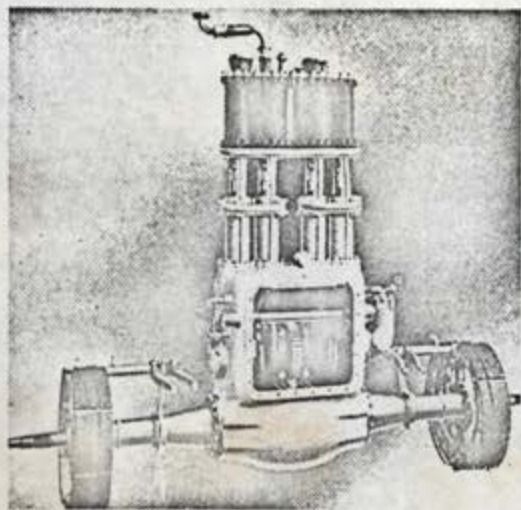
Doble engine with reduction gear, locking type differential, and brake shoes
